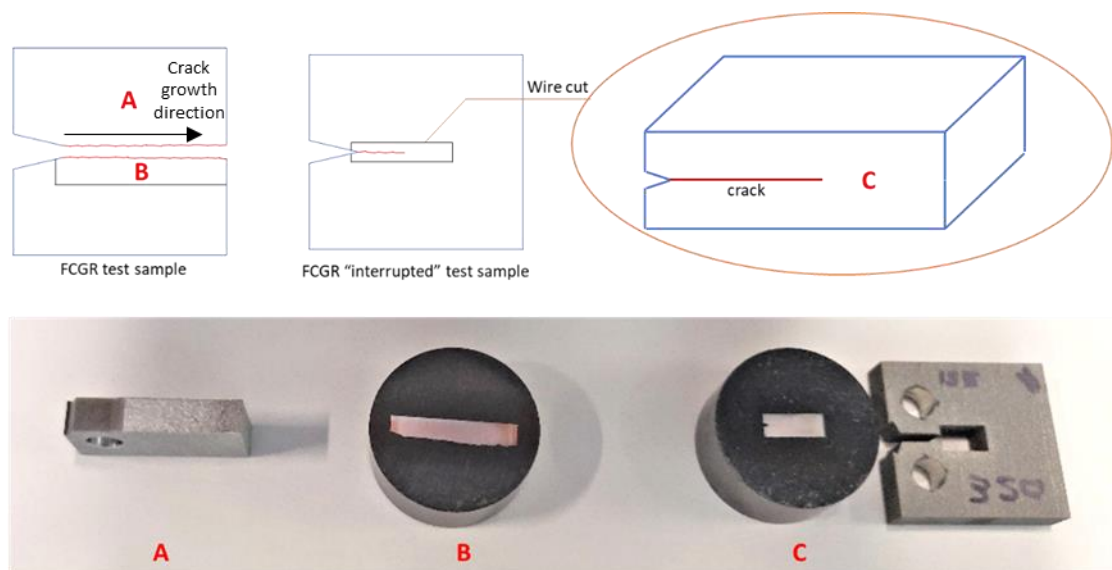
A) Fracture surface sample after FCGR test B) Crack profile sample after FCGR test C) Interrupted test sample after FCGR interrupted test
